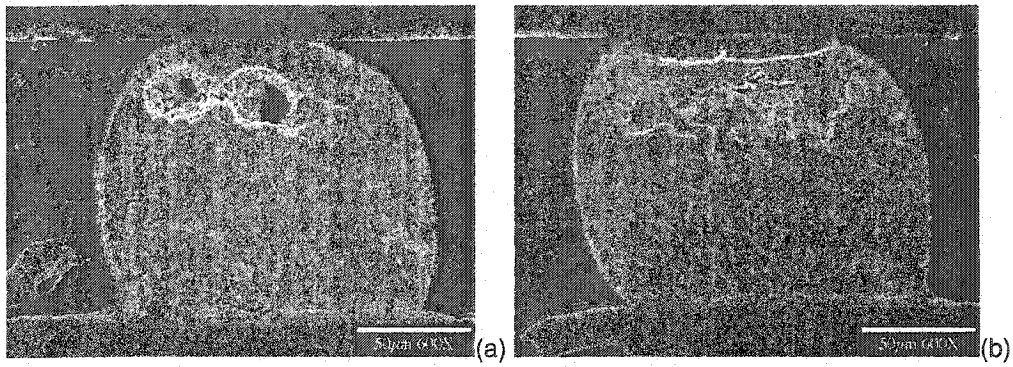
Secondary SEM of (a) solder joint A ($0.96 \times 10^4 A/cm^2$) (b) solder joint B ($1.0 \times 10^4 A/cm^2$) on Module #41 after 60 hrs 1A stressing
